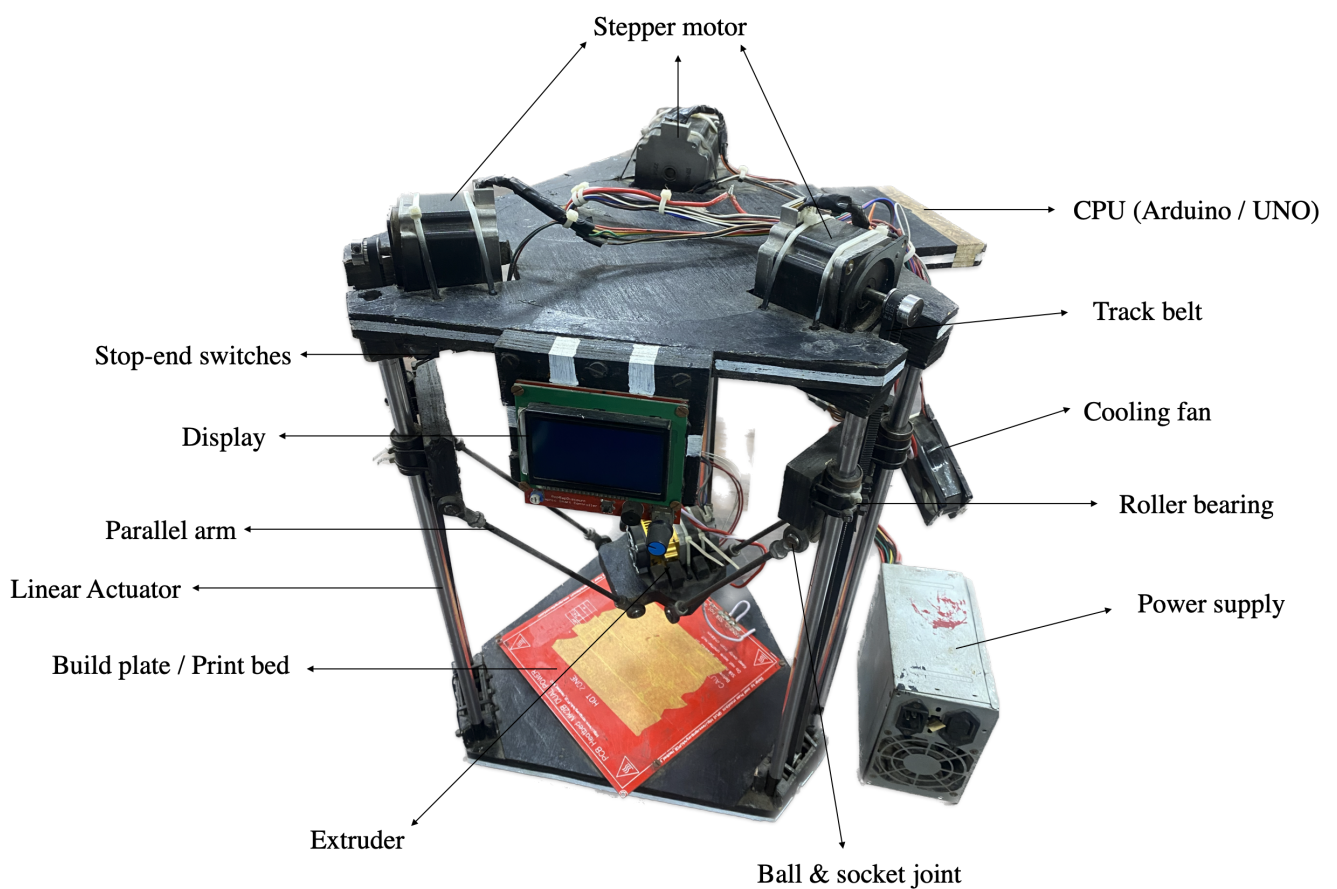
DELTA THREE-DIMENSIONAL PRINTER
